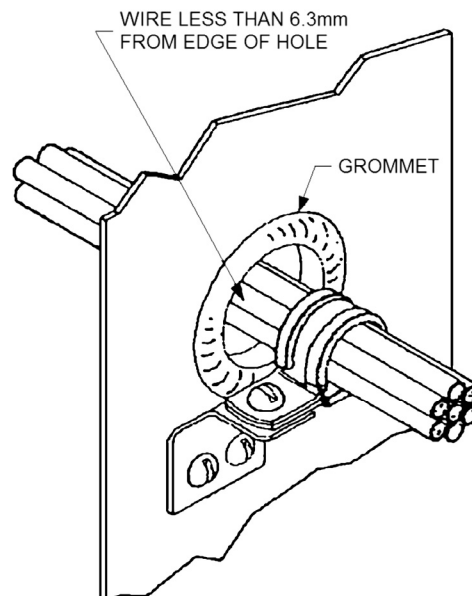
6 Cable Clamp and Grommet at Bulkhead Hole
